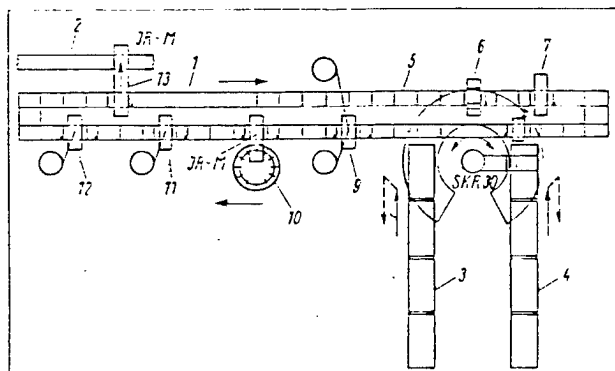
Lay-Out for Assembly Line for the Automated Assembly of Check Valves.
